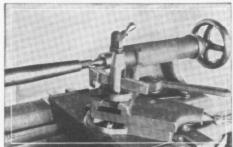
Chasing a Thread on an Automobile Axle in the Lathe
